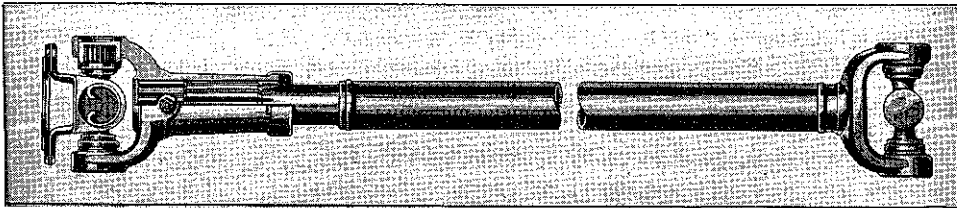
PROPELLER SHAFT AND UNIVERSAL JOINTS—NEEDLE BEARING TYPE
